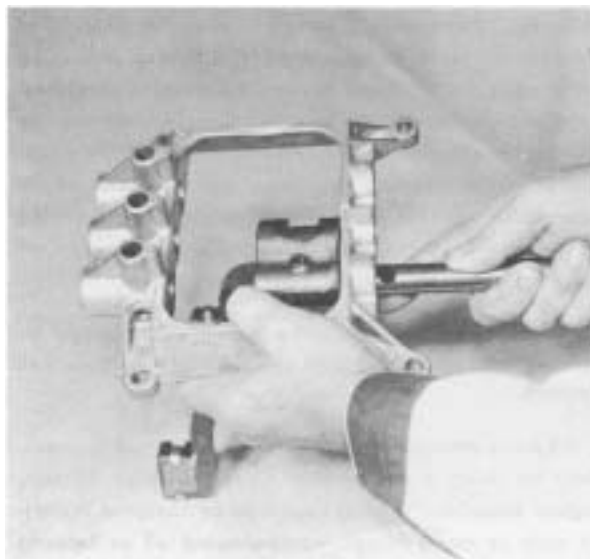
Install 4th & 5th shift rod through support and into 4th & 5th shift fork.
